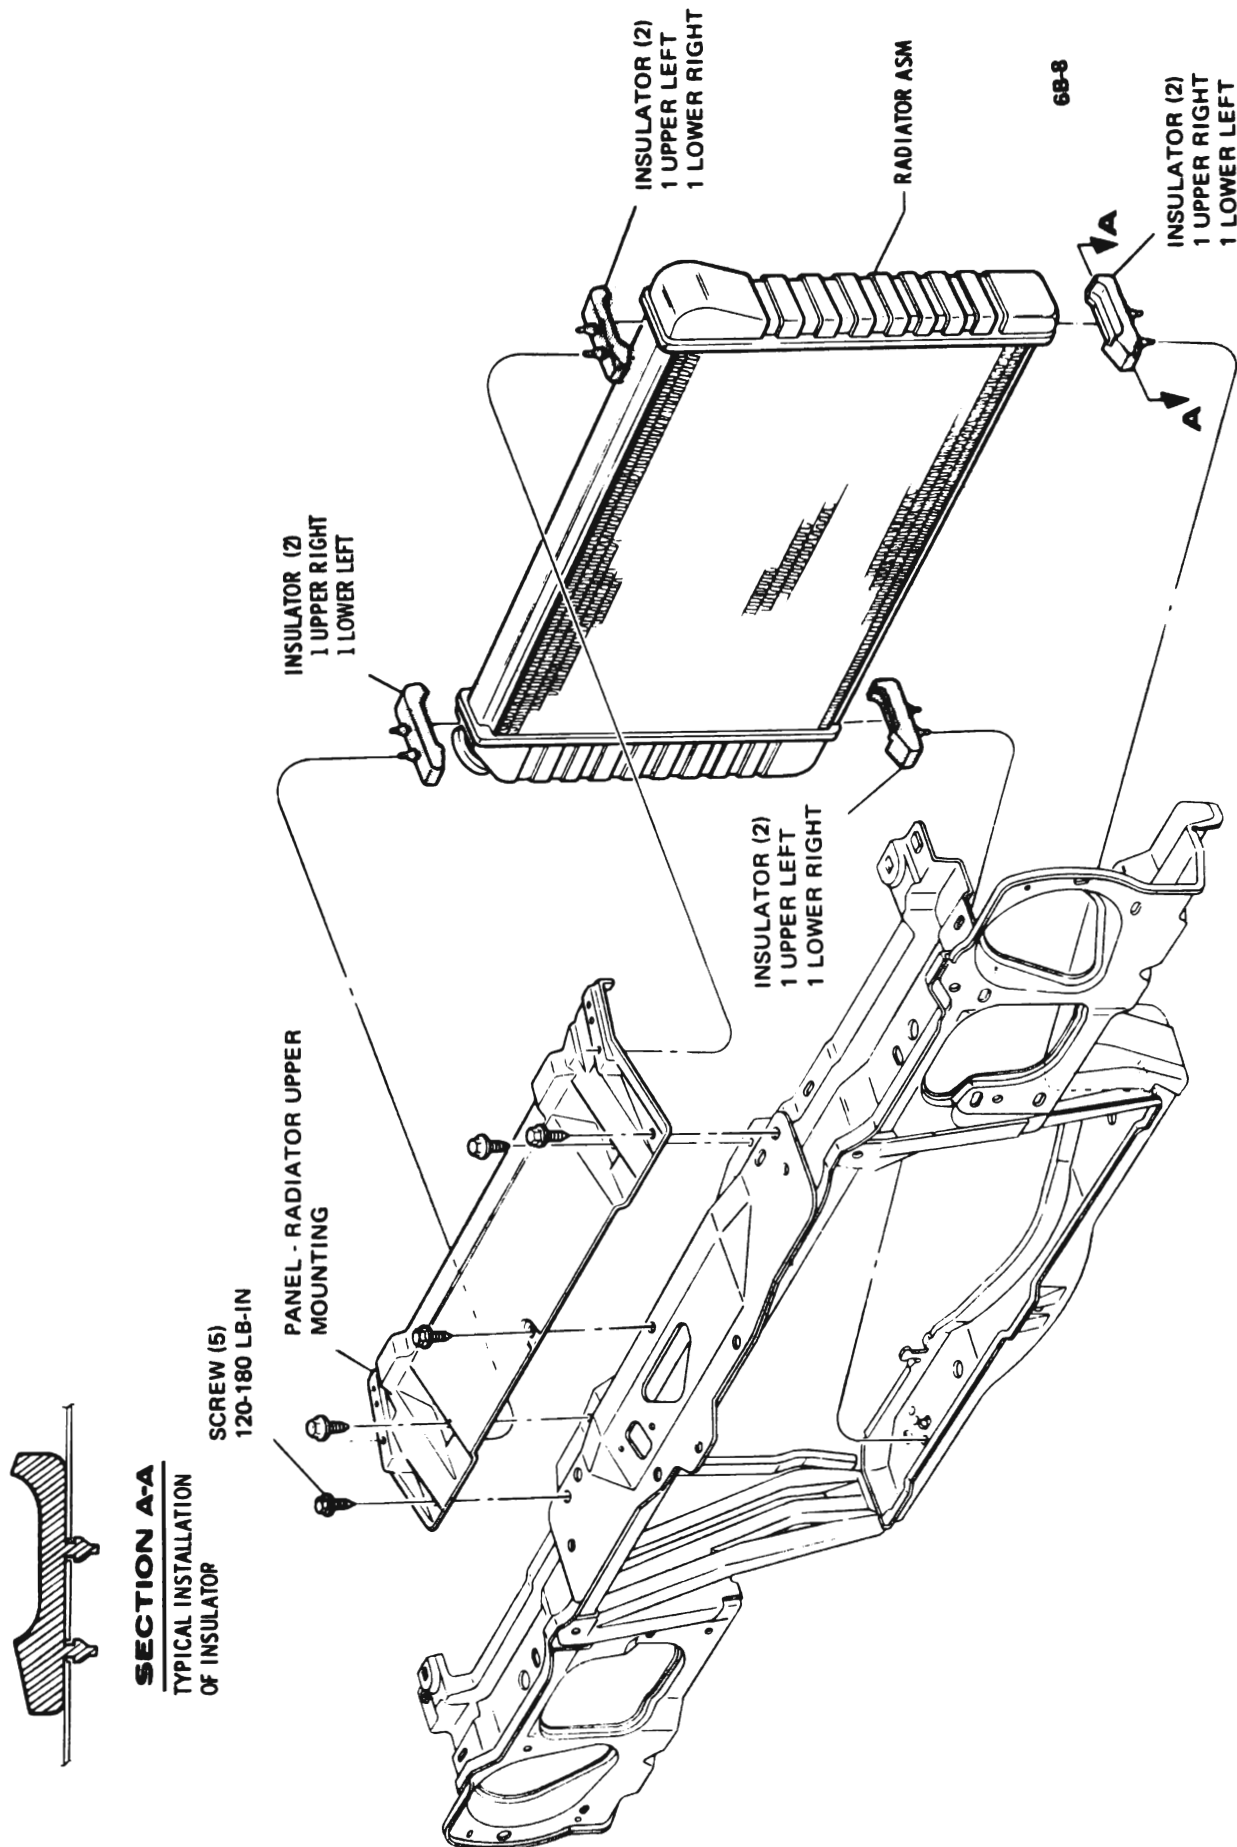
B-8 Upper Mounting Panel and Radiator Installation "A" Series
